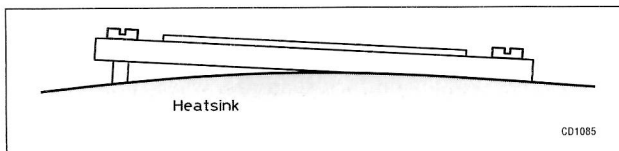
Hybrid module on convex heatsink with one fixing screw tightened
